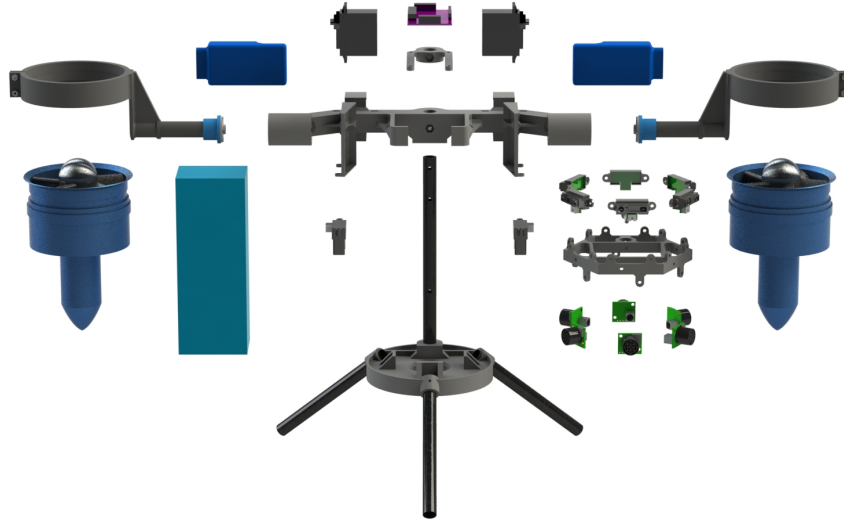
Exploded CAD rendering of all components used in the TRo.
